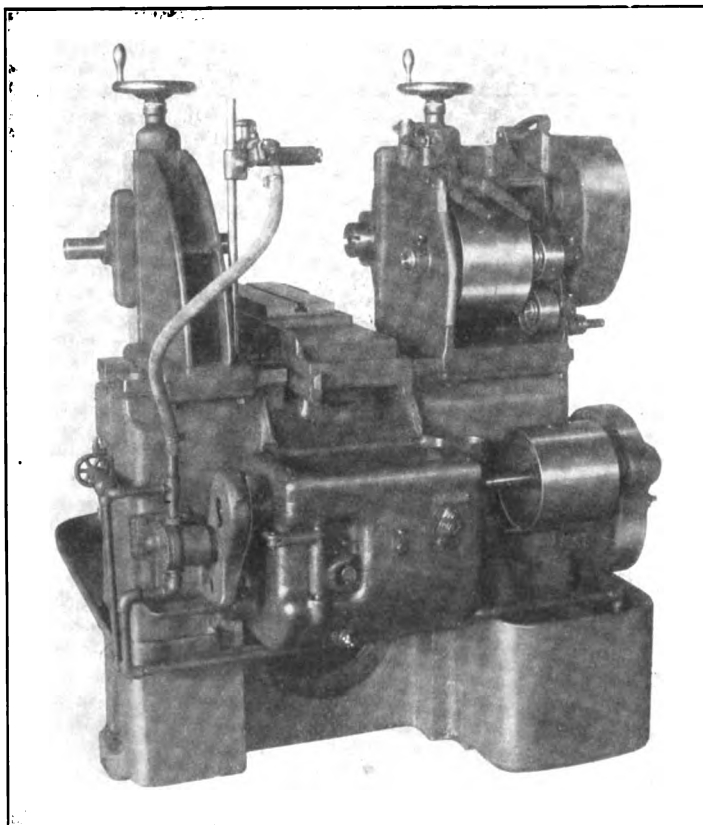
REAR VIEW OF THE AUTOMATIC MILLING MACHINE SHOWING DRIVING MECHANISM
